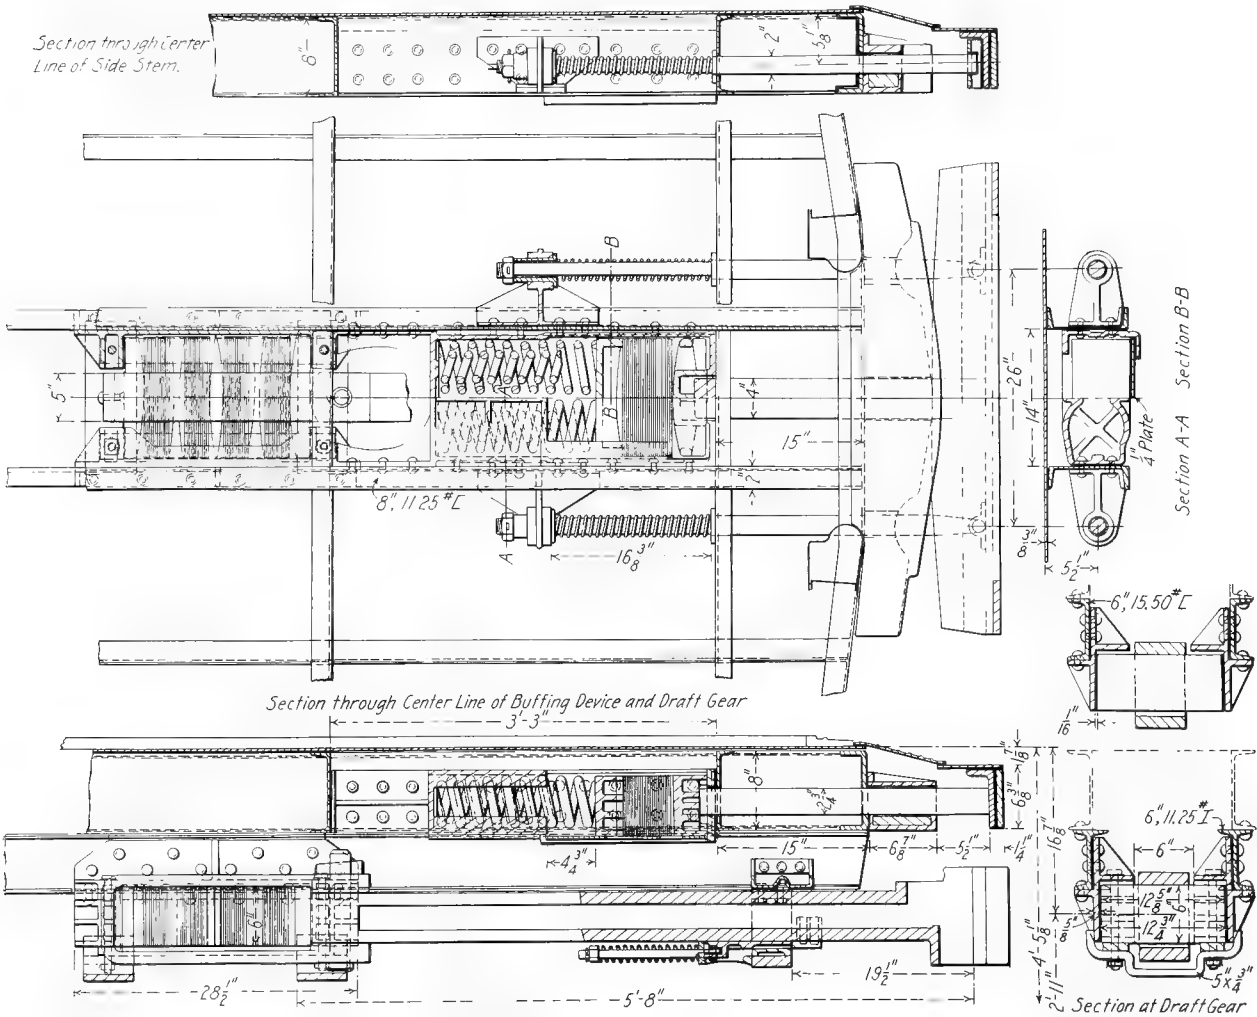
Waugh-Forsyth Buffering Device and Waugh Draft Gear as Applied to New York, Westchester & Boston Passenger Equipment. Waugh Draft Gear Company.
